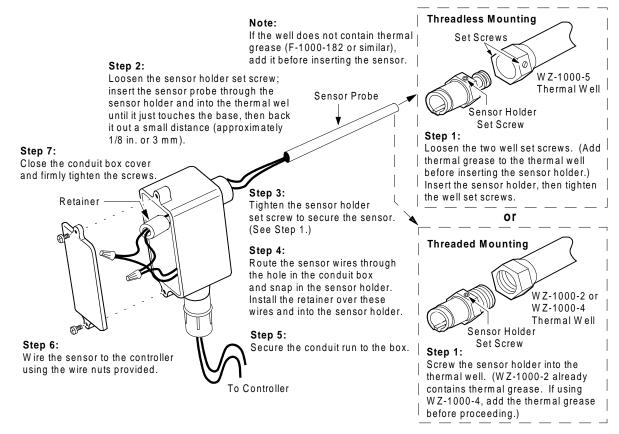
Installing the Well Sensor using the Sensor Holder and Retainer
